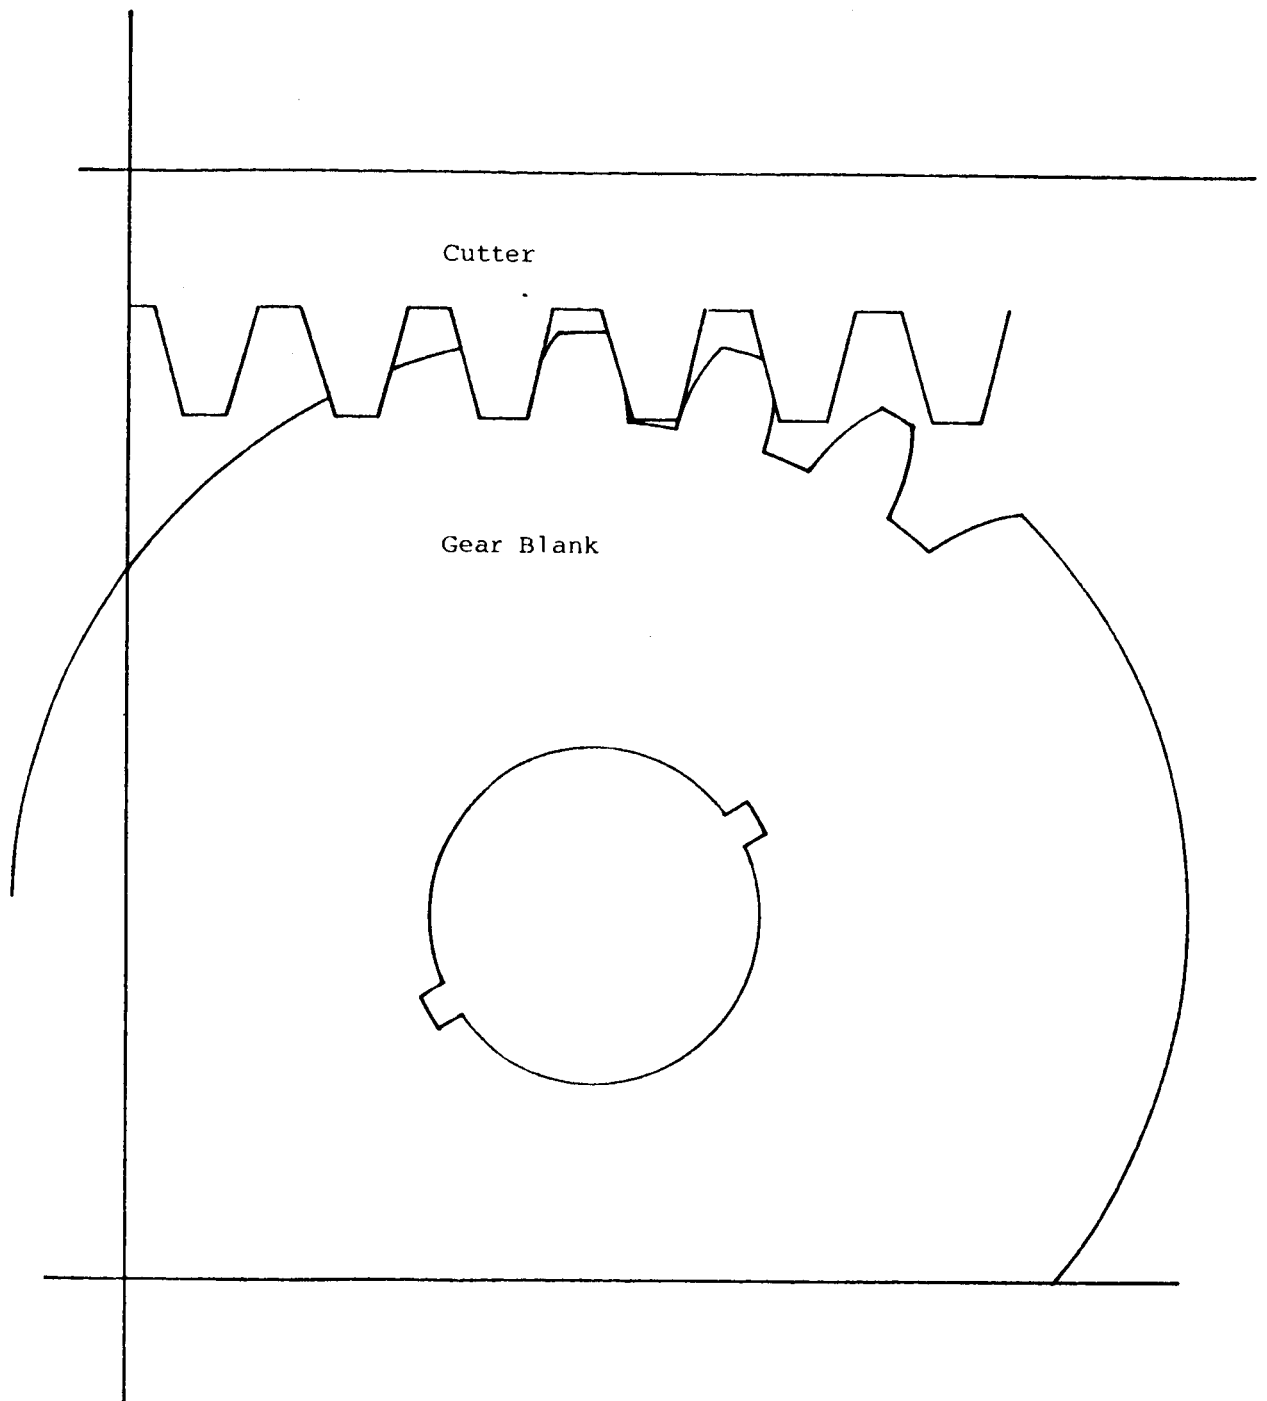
Generation of an Involute Tooth Profile By a Rack Cutter
